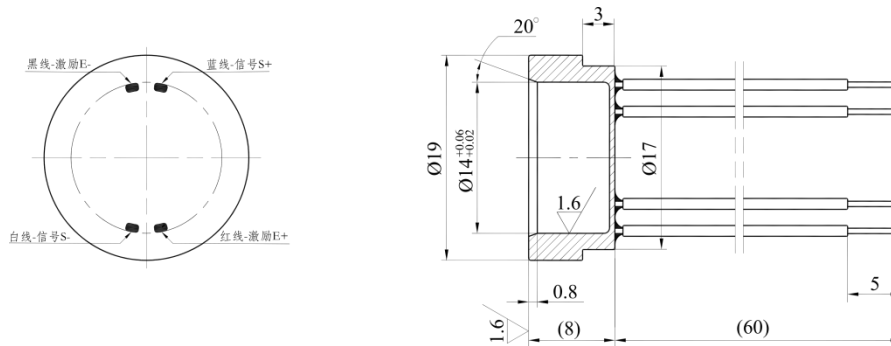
Dimension of gauge pressure and lead definition (Bottom seal)
